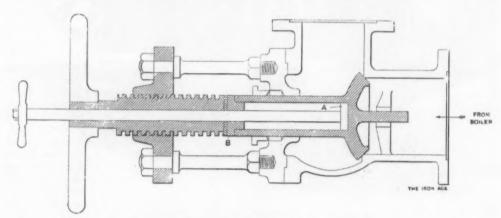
Horizontal Automatic Stop Valve, Old Form,
